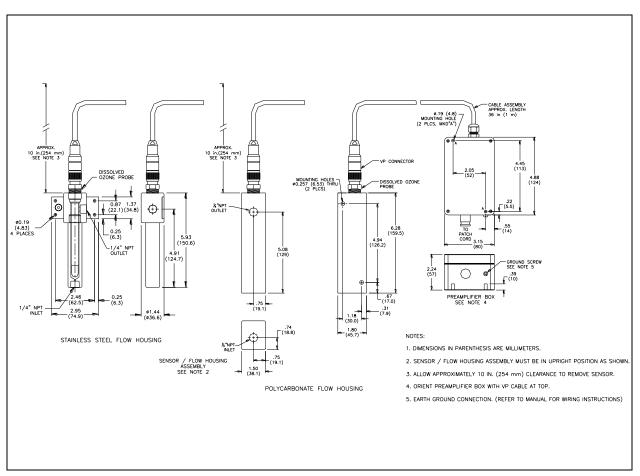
Mounting and Dimensions of Dissolved Ozone Sensors
